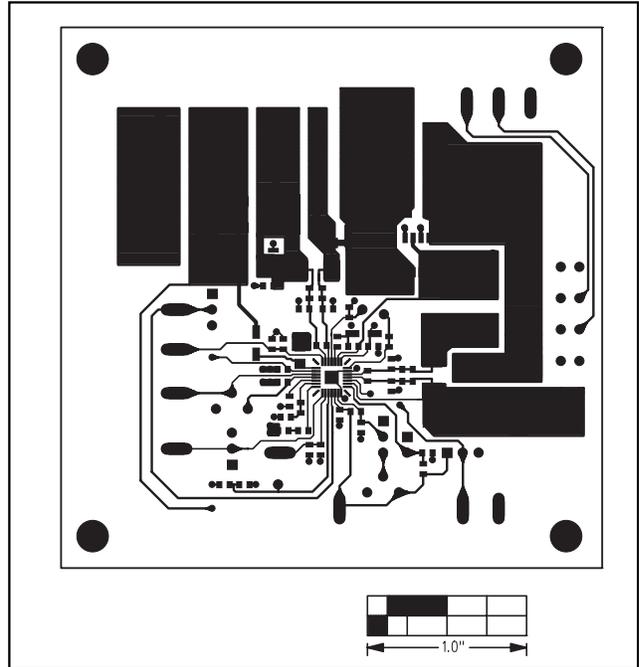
MAX1908 EV Kit PC Board Layout—Component Side
